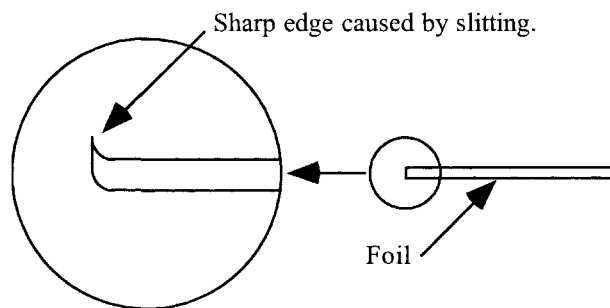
Foil with Sharp Edge Burrs after Slitting.
